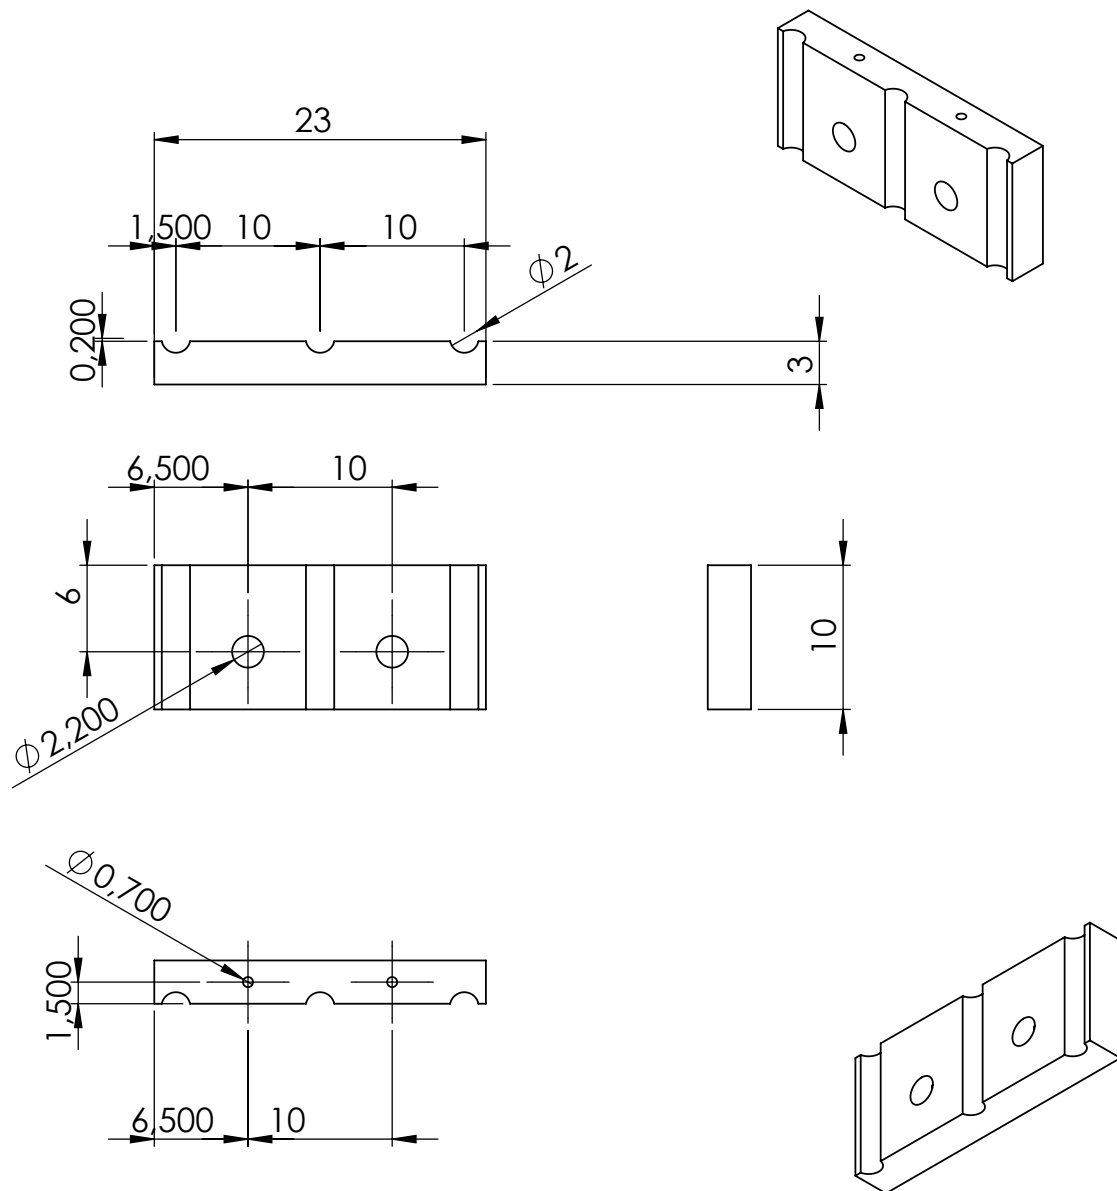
Technical drawing of a clamp which fastens the wires to the copper block.
